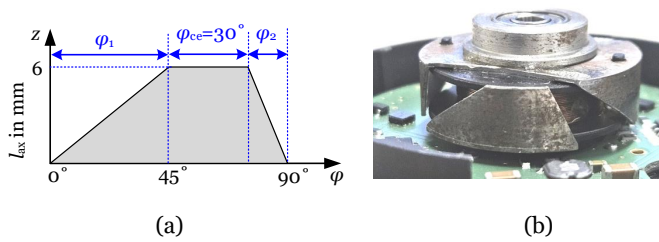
Claw-pole single-phase fan drive with asymmetric trapezoidal shape, D4: (a) drawing of the claw shape with dimensions and (b) a prototype of the stator.
